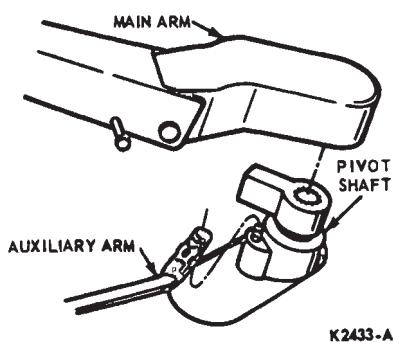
Driver Side Windshield Wiper Arm and Blade Assembly
